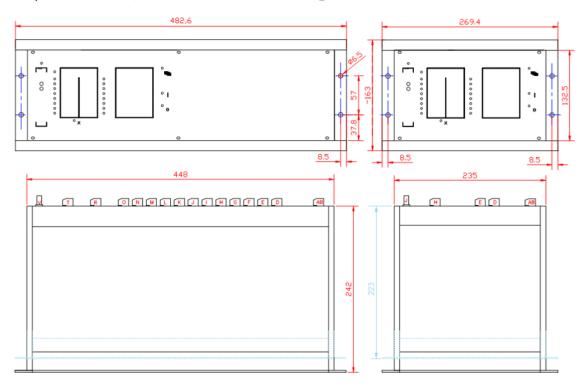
Dimensions for flush mounting of the previous 84HP and 42HP single rack, including the new (shorter) rack dimensions as well.
